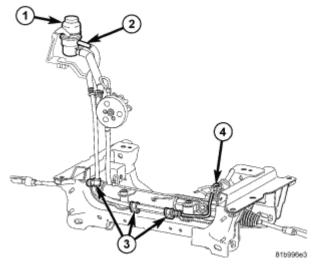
Pressure Hose & Mounting Bolts Courtesy of CHRYSLER LLC
